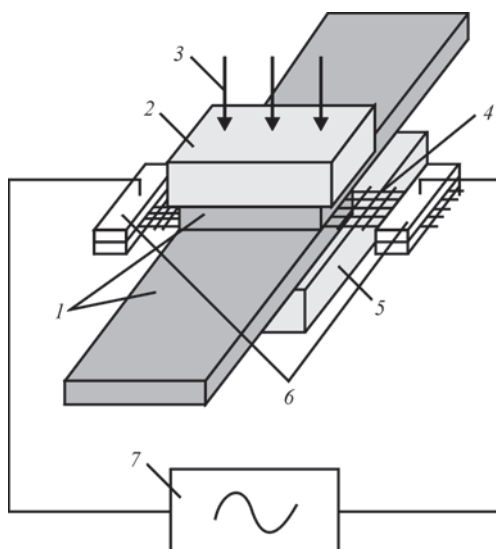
Schematic of the process of welding with embedded element: 1 — samples; 2 — clamp; 3 — working pressure; 4 — embedded element; 5 — base; 6 — electric contacts; 7 — power source
